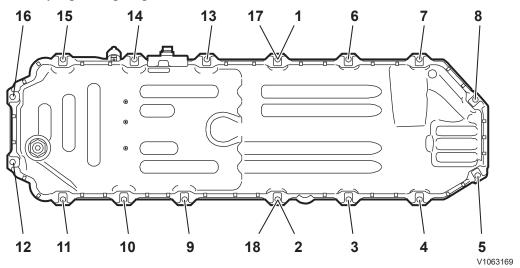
The illustration shows the oil sump for engine D13H, there may be some differences.
